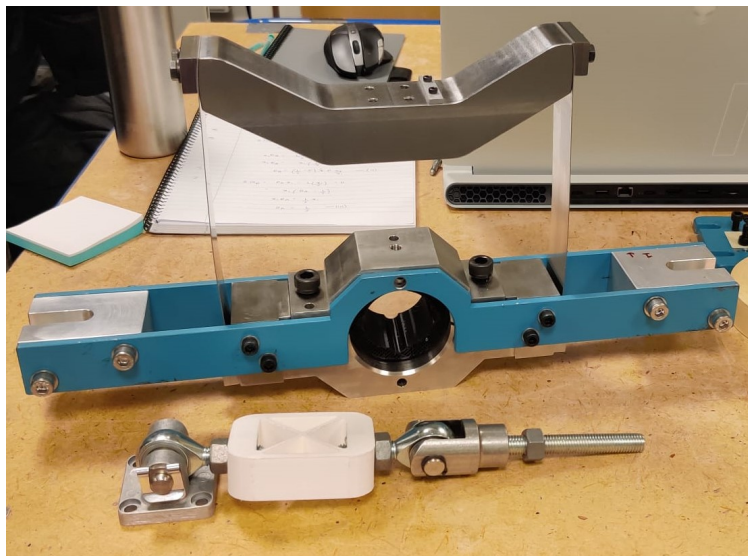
Sleeve housing (top) and temporary sensor (bottom) assemblies
